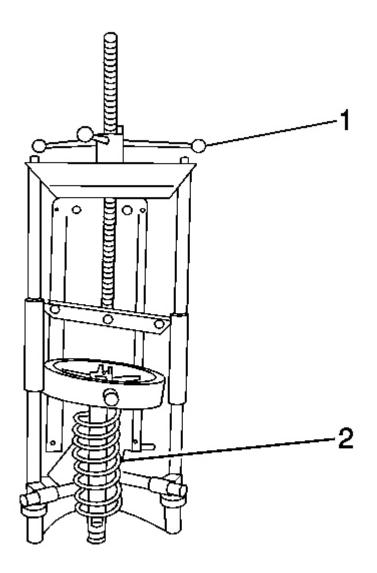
View Of Compressor Forcing Screw & Coil Spring Courtesy of GENERAL MOTORS CORP.
